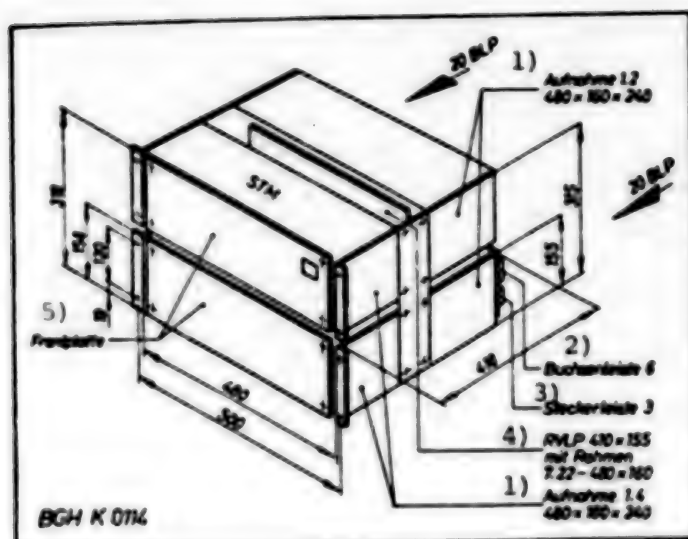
Dimensional Sketch of the Subassembly Unit K 0116
